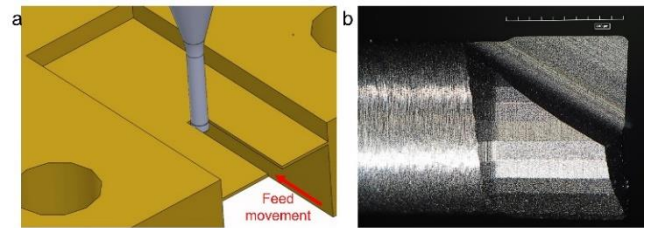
(a) Cutting test process methodology; (b) employed micro-end mill.
